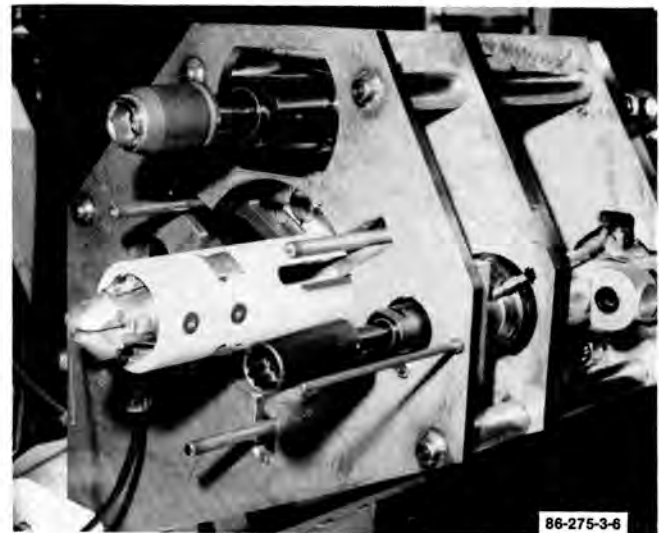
A view of the Head Removal Machine showing canister head grapple and small and large nut runners.
